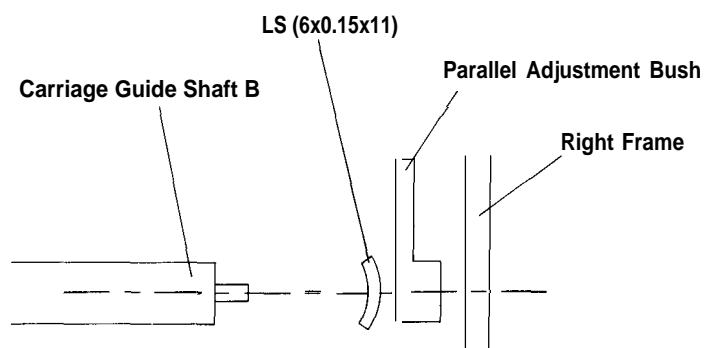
Leaf Spring and Parallel Adjustment Bush Installation
